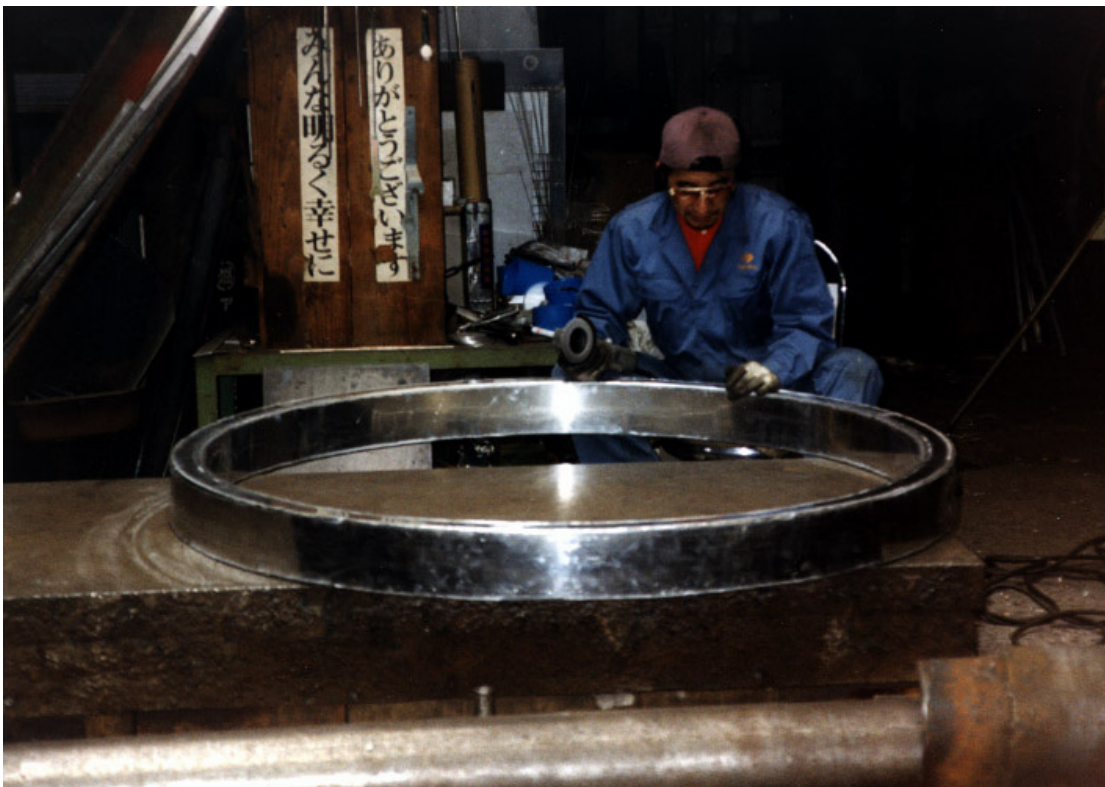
Central Dome: a skilled worker is grinding aluminium top ring
